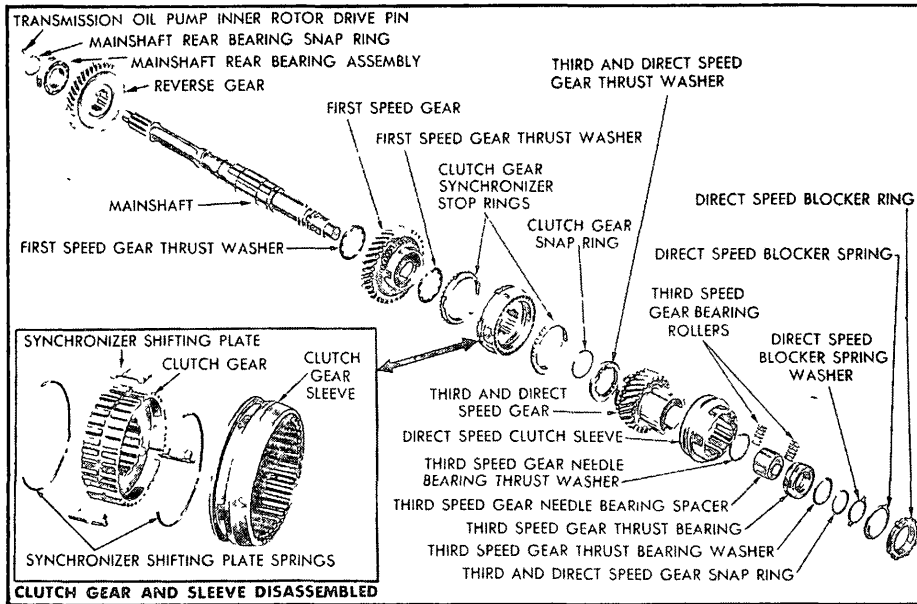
Layout of mainshaft parts. 1949-52 automatic transmission
